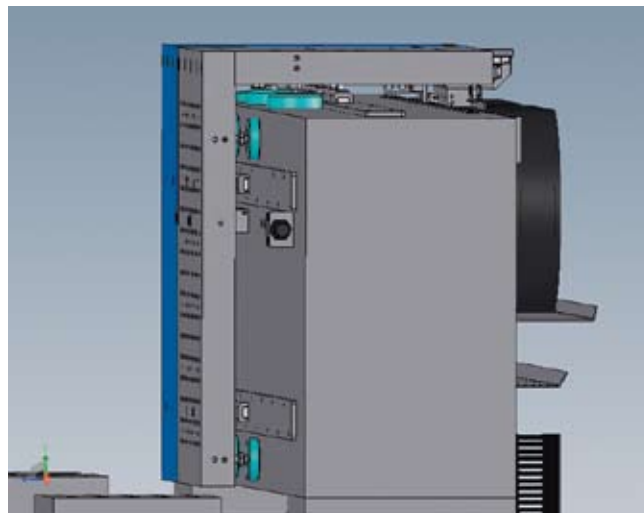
Sideview of the upper axis carriage, showing the guidance air-bearing pucks.
